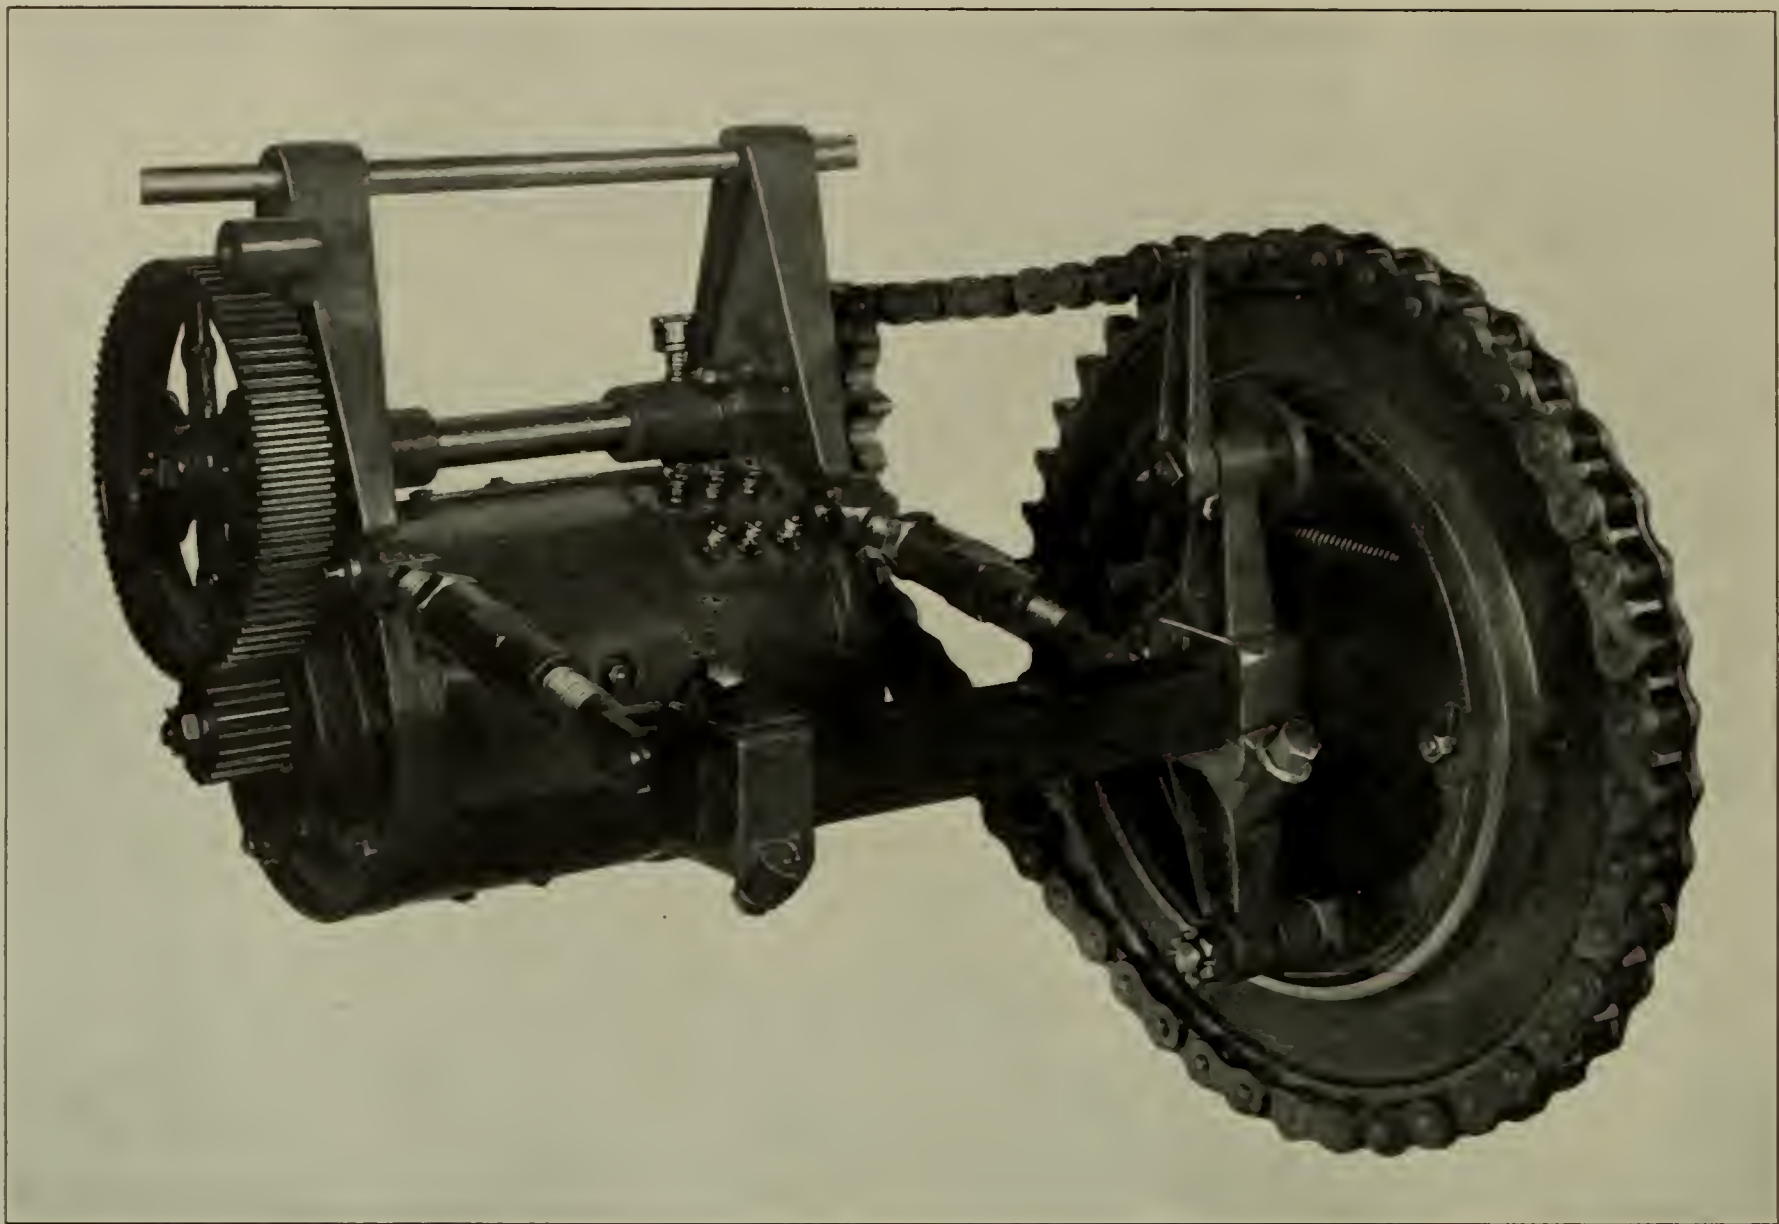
A COMPLETE MOTOR EQUIPMENT BUILT BY HAYDEN EAMES, CLEVELAND, OHIO, FOR ONE SIDE OF A 5-TON TRUCK
